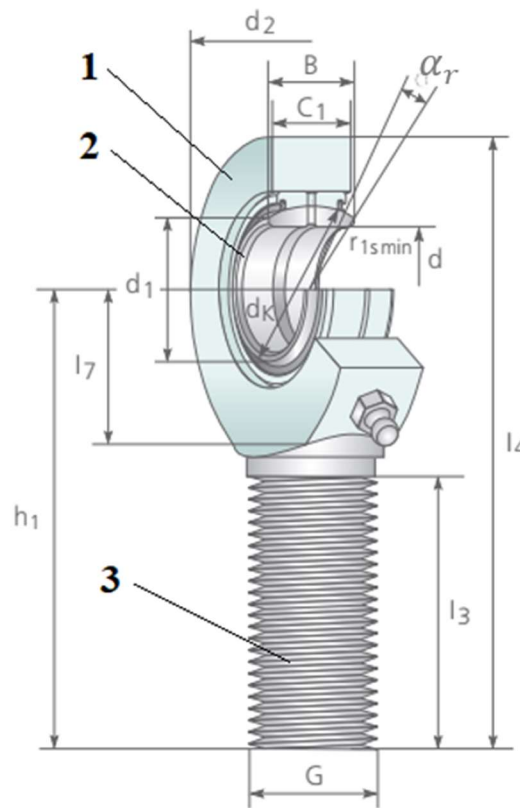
Rod end bearing Ø15 mm for investigated ball valve of nominal diameter 100 mm:
